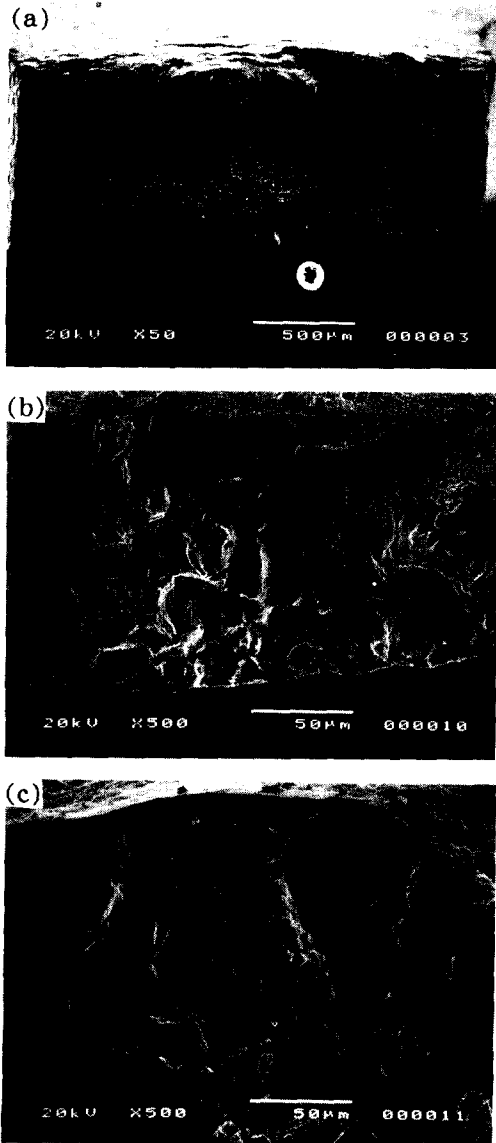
Fractographs of (a): A/R specimen after CERT, (b): magnified view of lower(ID) edge in (a), and (c): magnified view of upper(OD) edge in (a).
